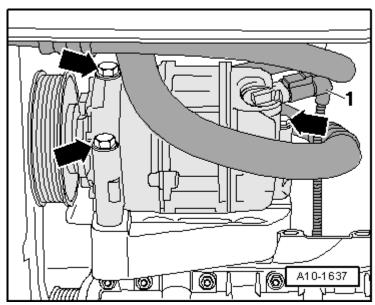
A/C Compressor Bolts And Solenoid Clutch Electrical Connector Courtesy of AUDI OF AMERICA, LLC
